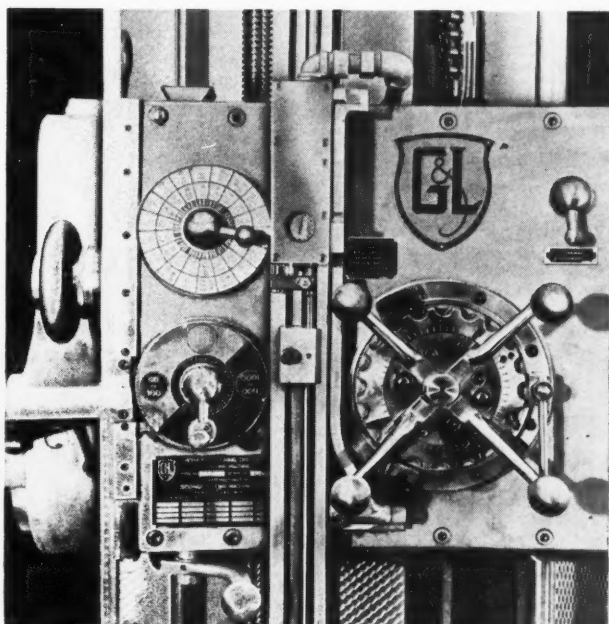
Close-up view of dial indicator, selector switch, and adjustable stop arrangement of headstock vertical movement control
